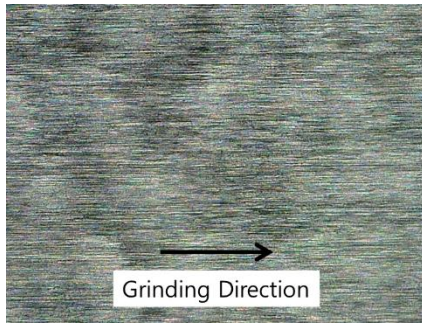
Photography of tool surface after grinding (Ra : 0.225 μm)
